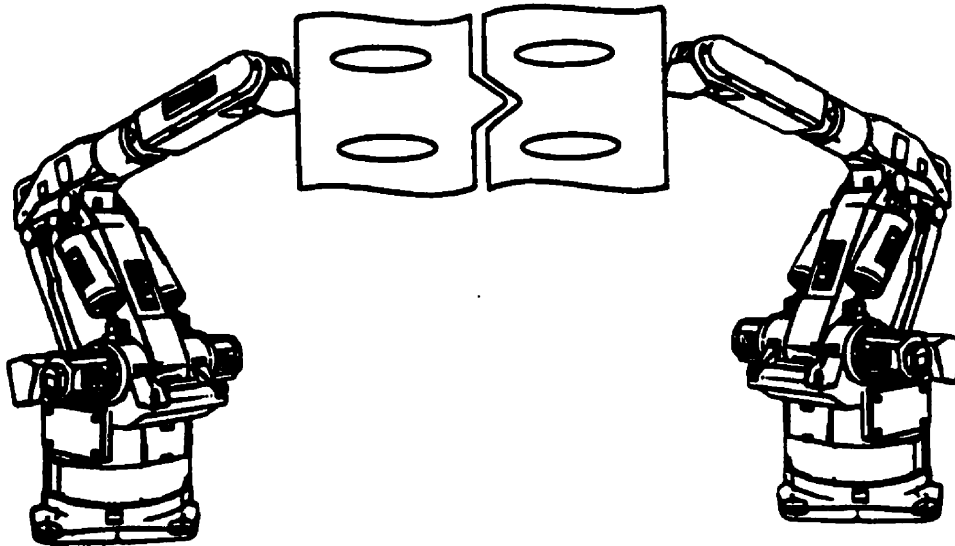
Schematic of Fixtureless Assembly of Sheet Metal Parts
